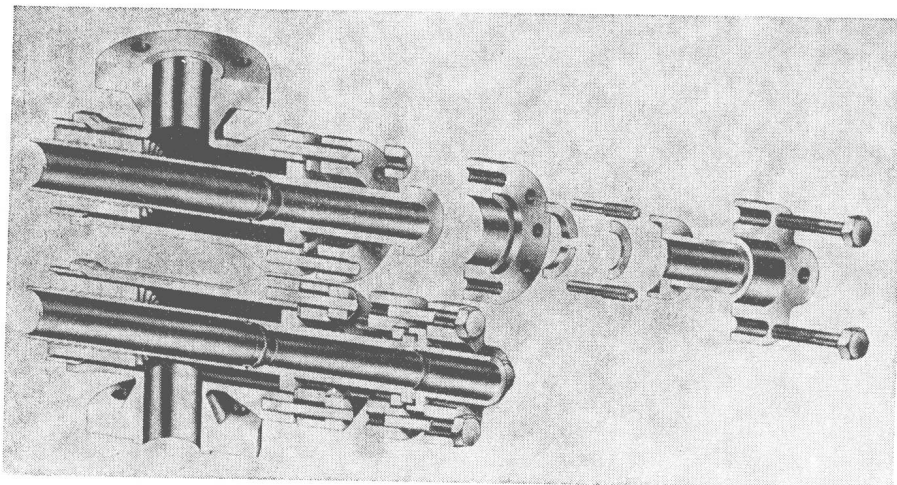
C. (Left) Standard fixed-end closure, exploded view. (Courtesy ALCO Products, Inc.)
